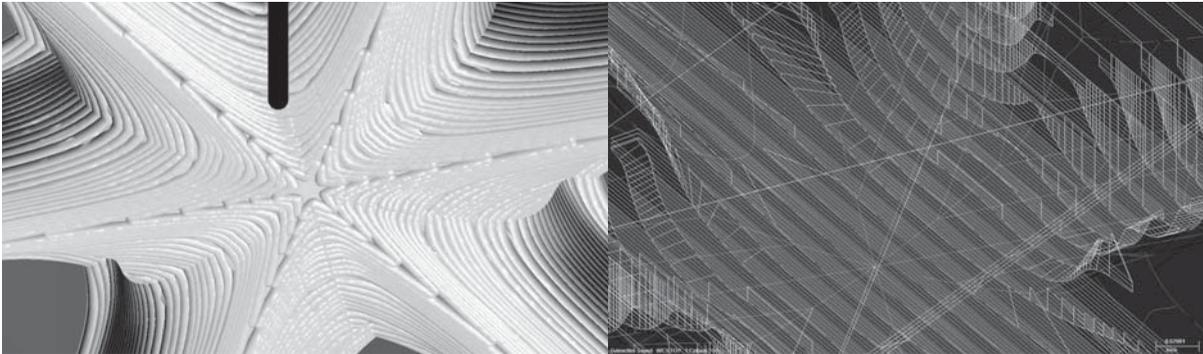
Surface tool paths and cut animation in MasterCAM
